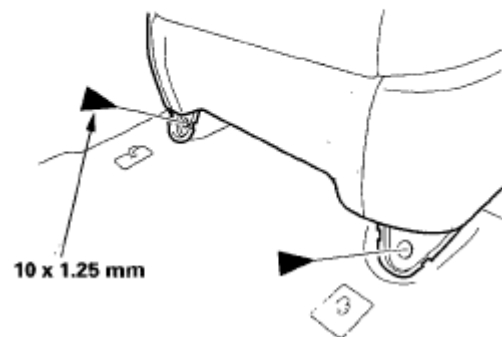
Identifying Front Inner Seat Track End Cover Bolts
